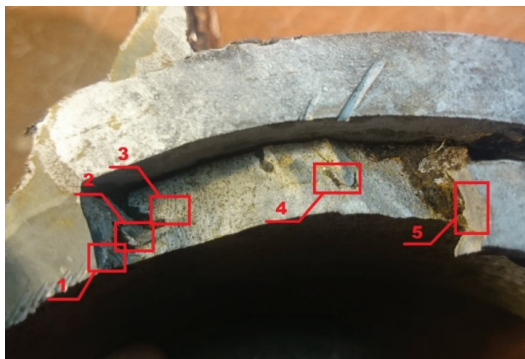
Fracture surface: Areas 1 to 5 are used for fractographic analysis.
